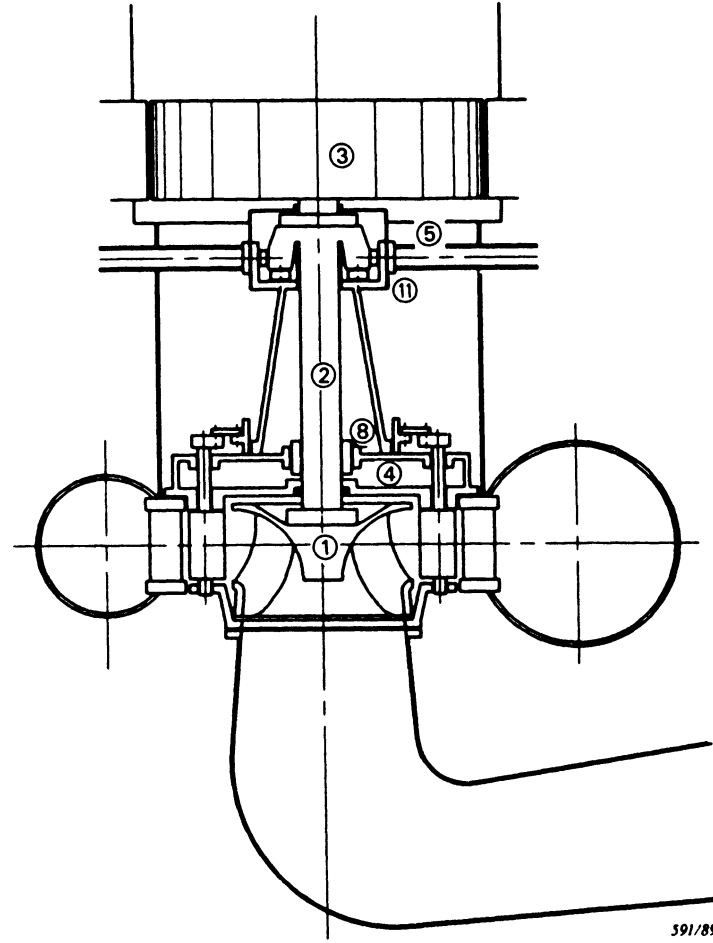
Example of a vertical machine (Francis turbine) of umbrella type with the bearing on the turbine head cover and cantilever arrangement of the generator
